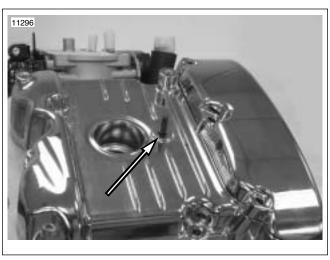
Gasket Alignment Tool (H-D-45340)
